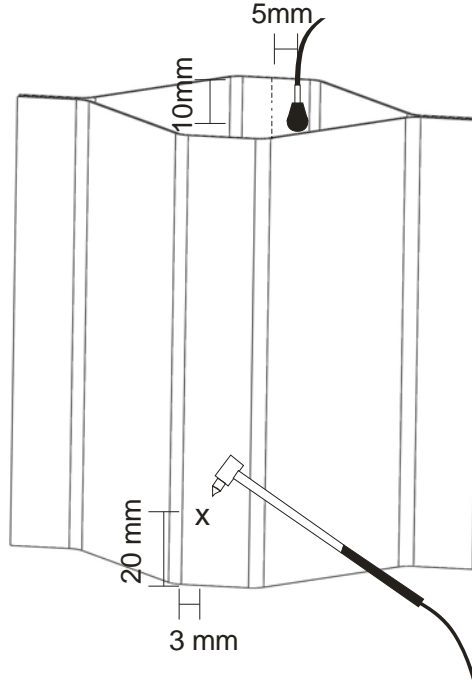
Experimental setup for FRF measurements of spot welded assemblies using impact hammer.
